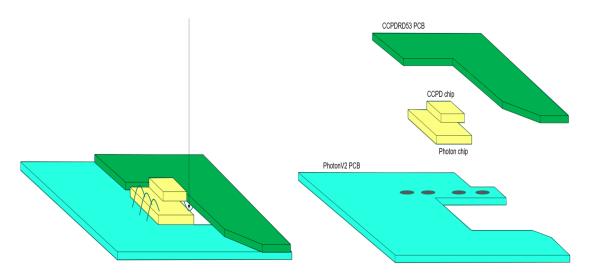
Assembly with the CCPD53 chip and the PHOTON chip. The chips are wire bonded to different PCBs.
